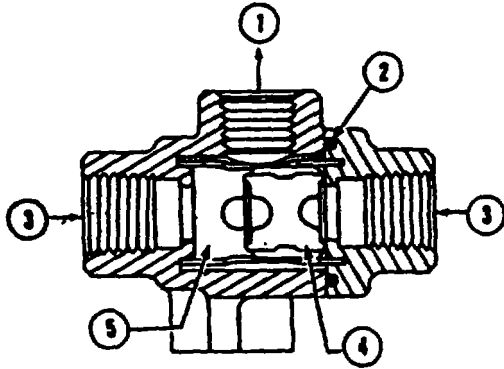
Sectional View of Double Check Valve Shuttle Type
